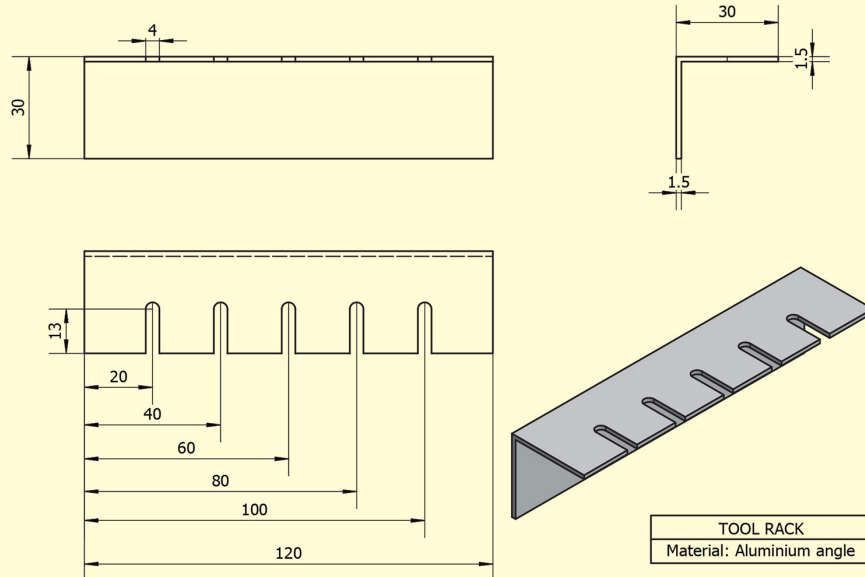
Suggested dimensions for a slotted tool rack.
